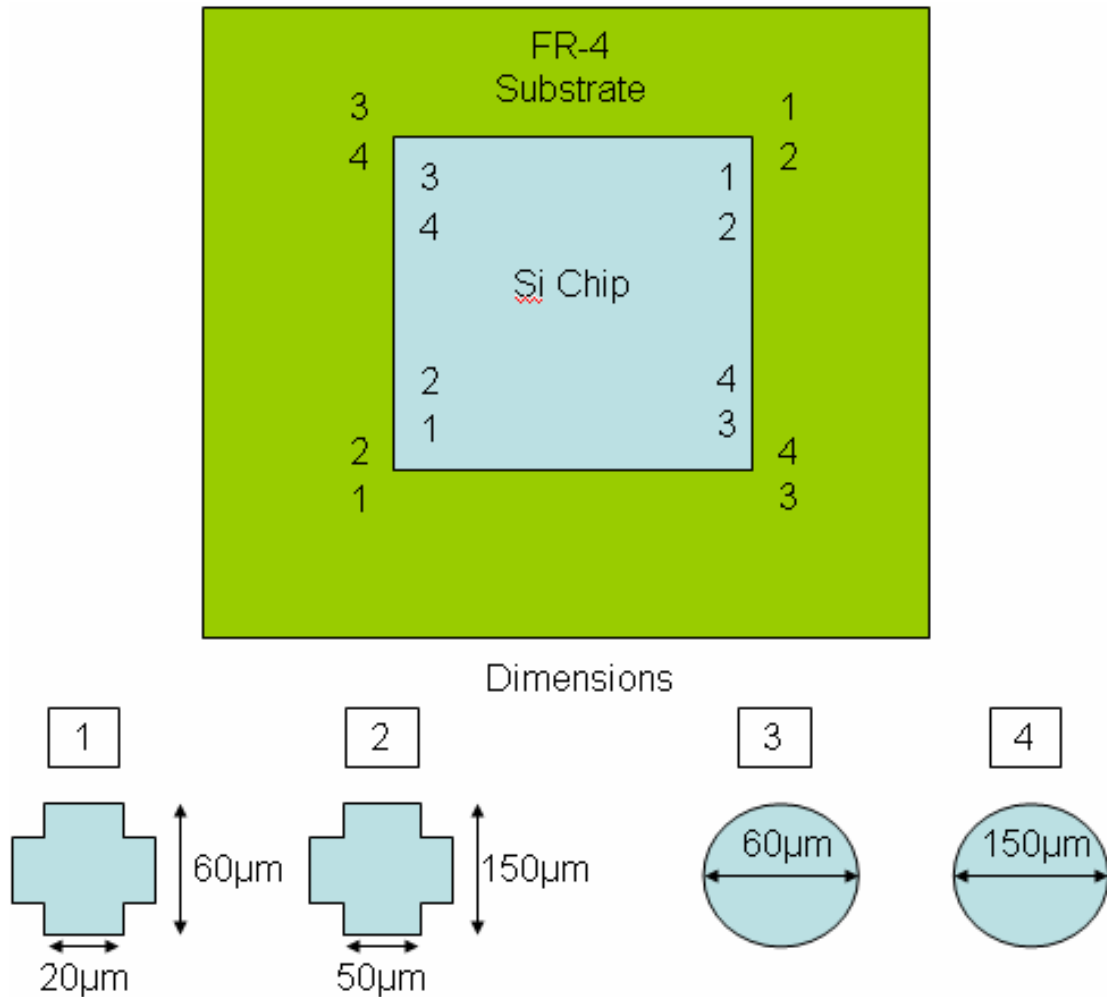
Fiducial dimensions and Locations on the PWB.
